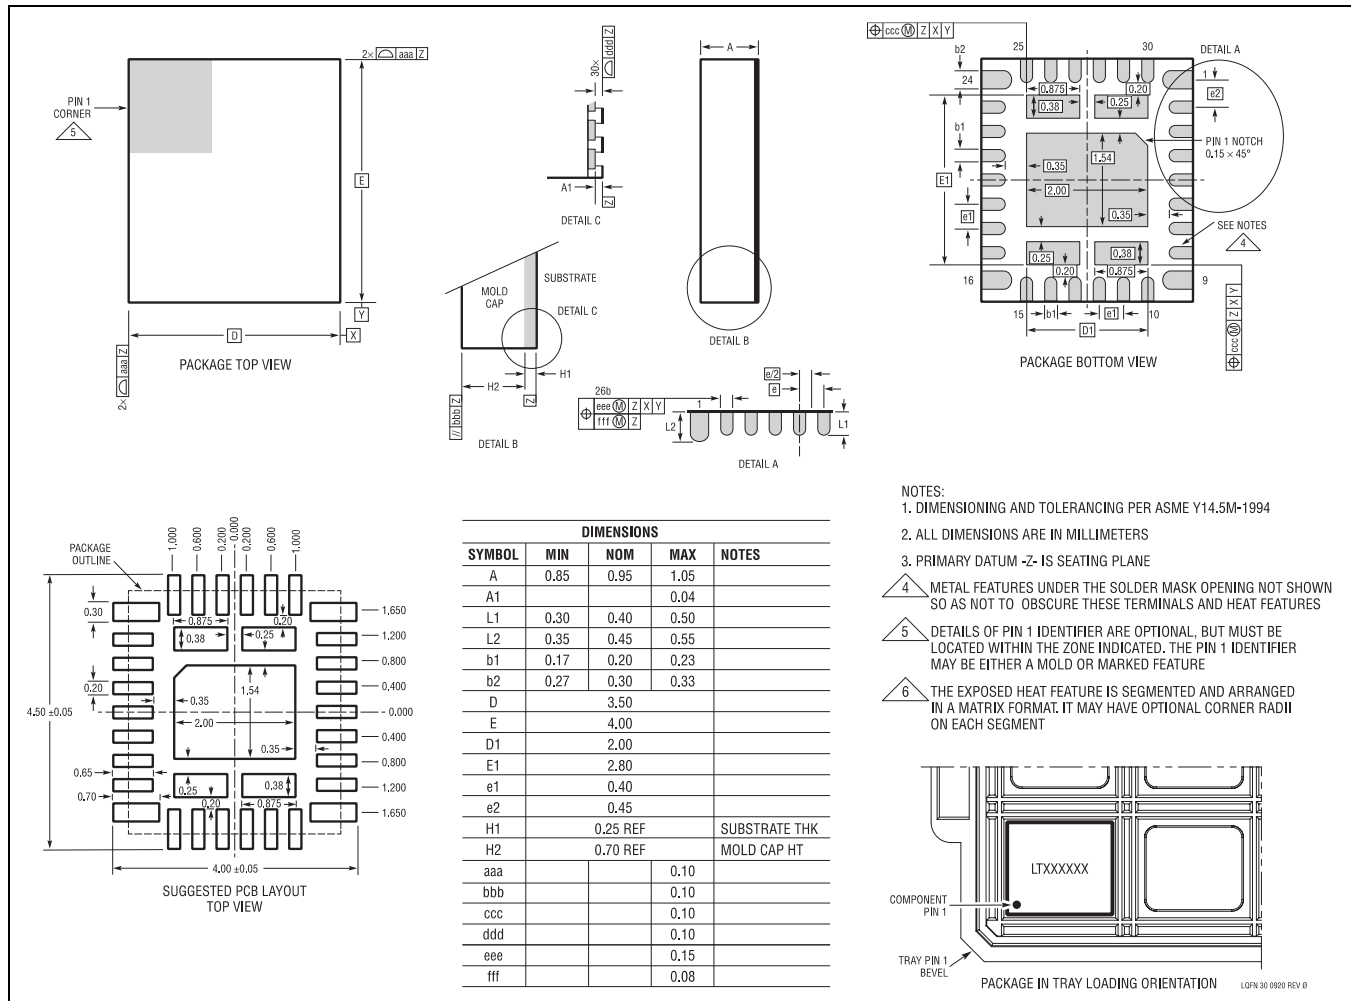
30-lead (3.5mm × 4mm) LQFN Package (05-08-7066) Dimensions shown in millimeters
